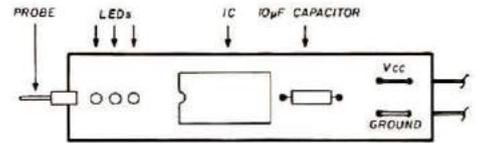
A suggested parts placement for the perf board assembly, top view. Only the major components are shown. Point-to-point wiring will be adequate.
